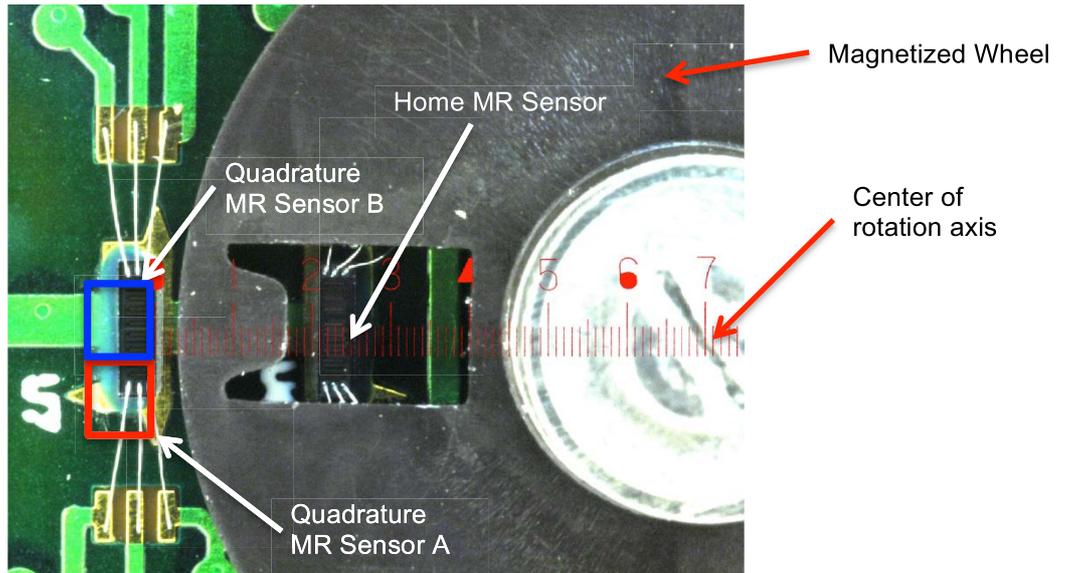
Back side of Encoder Assembly installed on a motor showing the relative positions of the MR sensors and the magnetized wheel.
